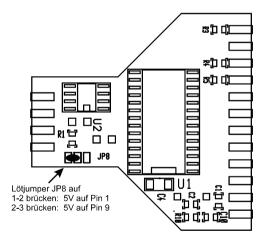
Soldering jumper on the PCAN-Dongle PCB
